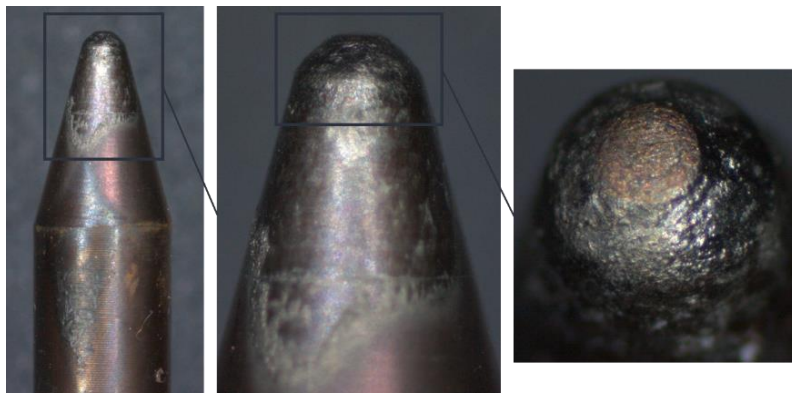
Used series standard needle (TiCN coating) with leakage after 8.8 million cycles working with Osprey 316L feedstock
